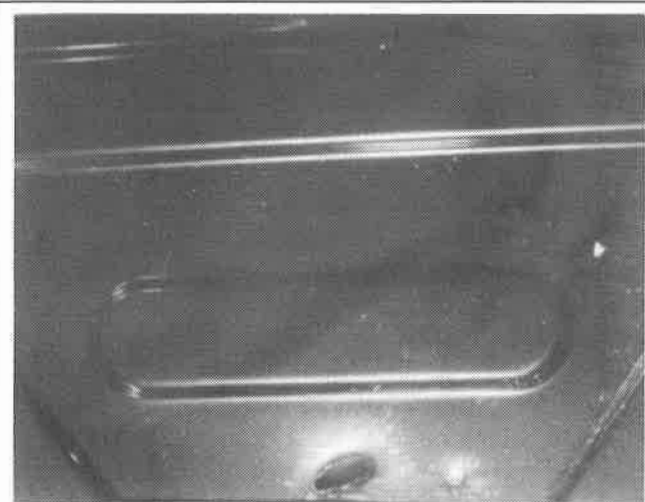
Oblong hole in the steel sheet metal of the back of the rear seat
